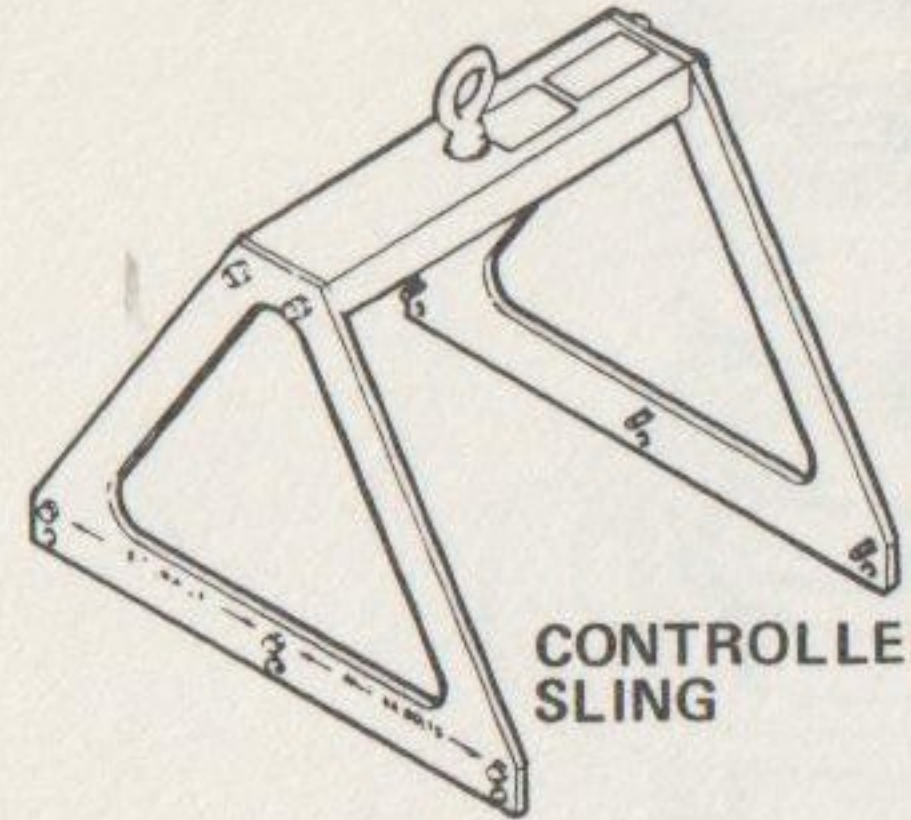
COMPONENT HANDLER SLING SET (SHEET 1 OF 3)
